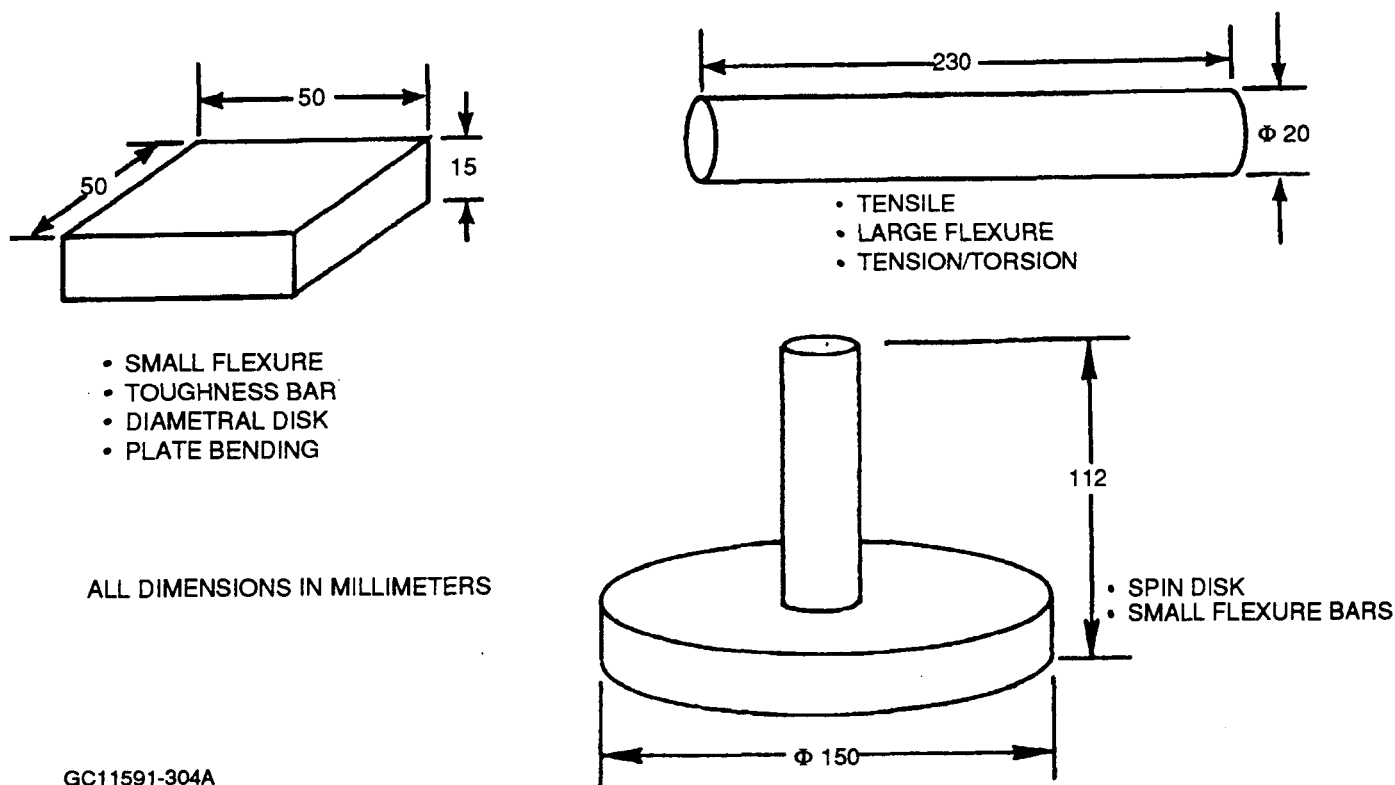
Test Specimens Were Processed From One Of Three Billet Geometries.
